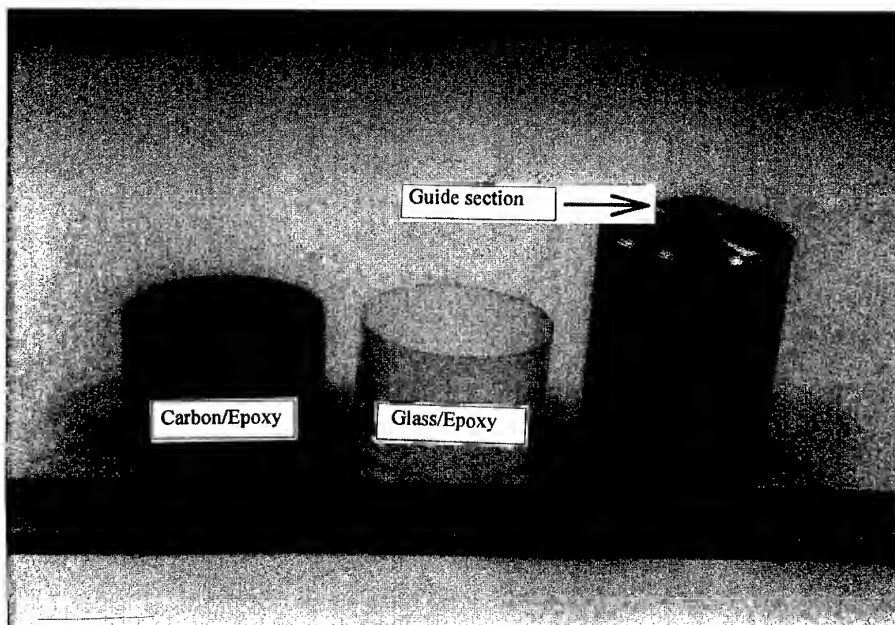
Composite tube and cylindrical fixture for concentric bonding.
